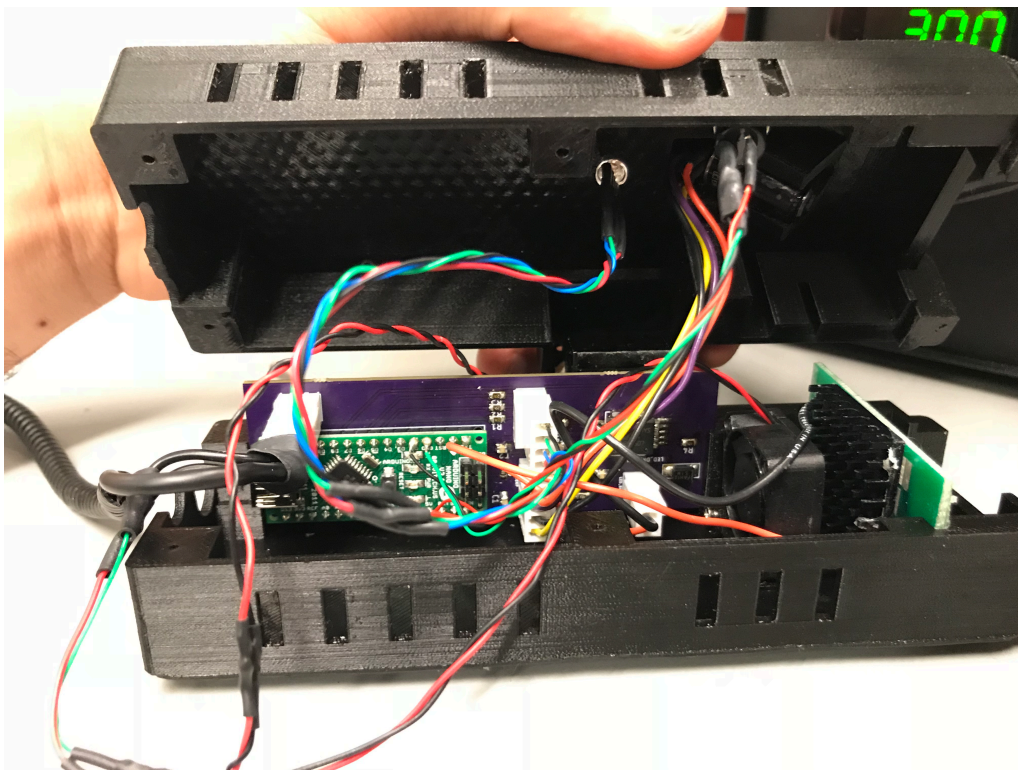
UnTape Wand 3rd Gen Internal Assembly
